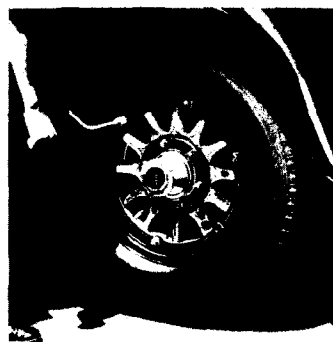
Rotate the wheel until the valve stem is at the top, and pull the bottom of the rim away from the wheel.
